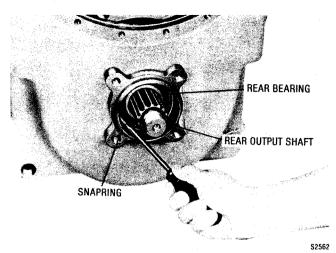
Removing rear output shaft bearing snapring (-1 models with output disconnect or with no front output)
